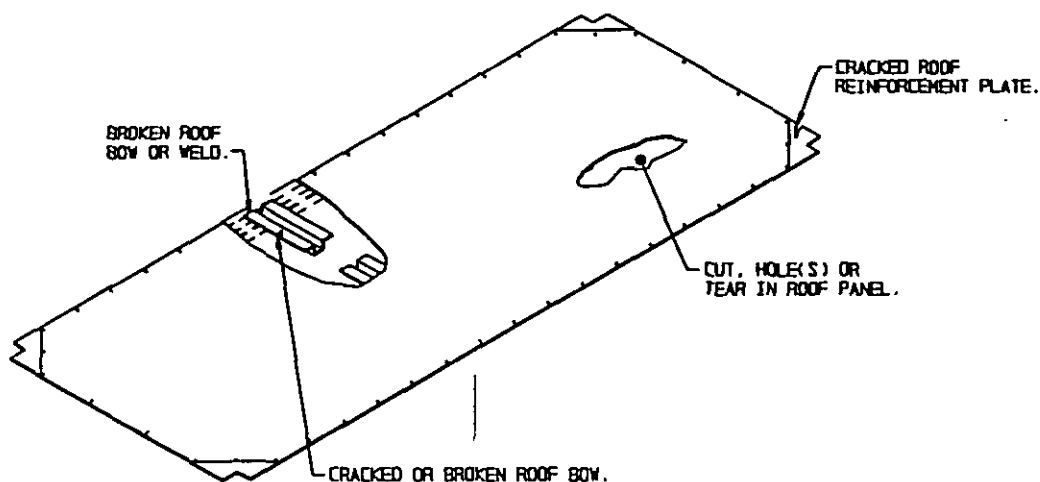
A - ROOF ASSEMBLY DAMAGE
